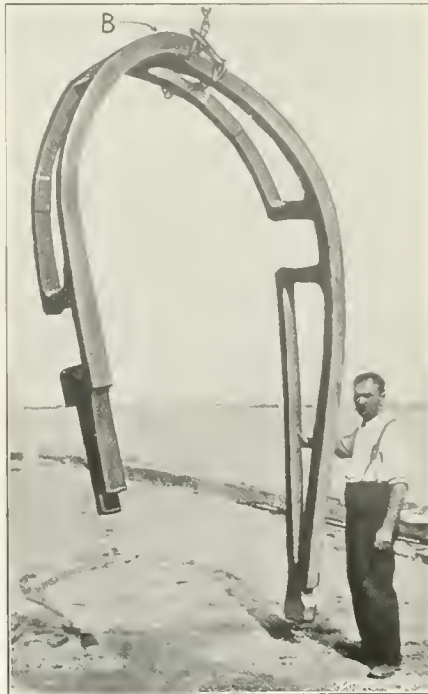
Locomotive Side Frame Bent Cold without Fracture
